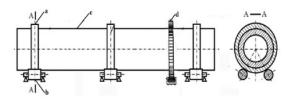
The sketch of the large-scale rotary machine with multisupporting. (a: tyre, b: roller, c: body, d: kiln drive)
